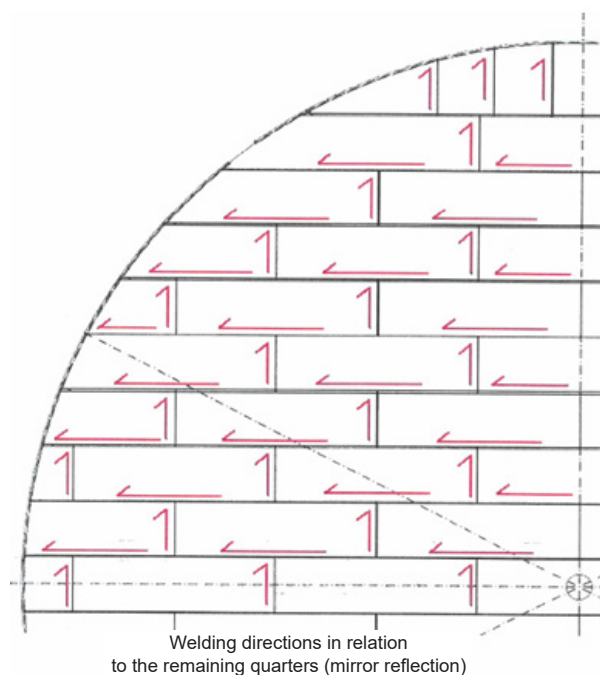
Schematic diagram presenting the welding of the storage tank head
